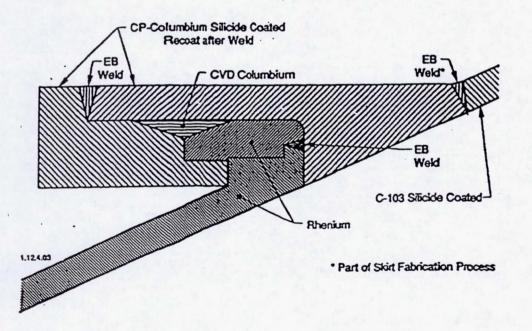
Re-to-C103 Nozzle Joint for Flight-Type, 440 N Engine (ref. 4)
